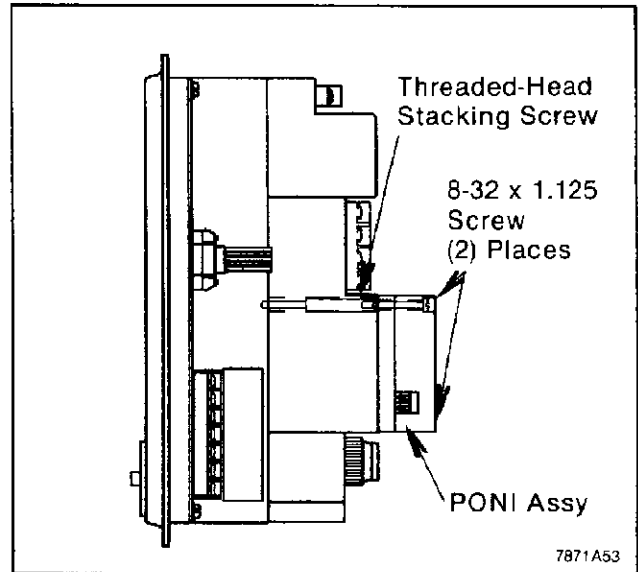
IQ Data Plus, with Power Module and threaded-head stacking screw
